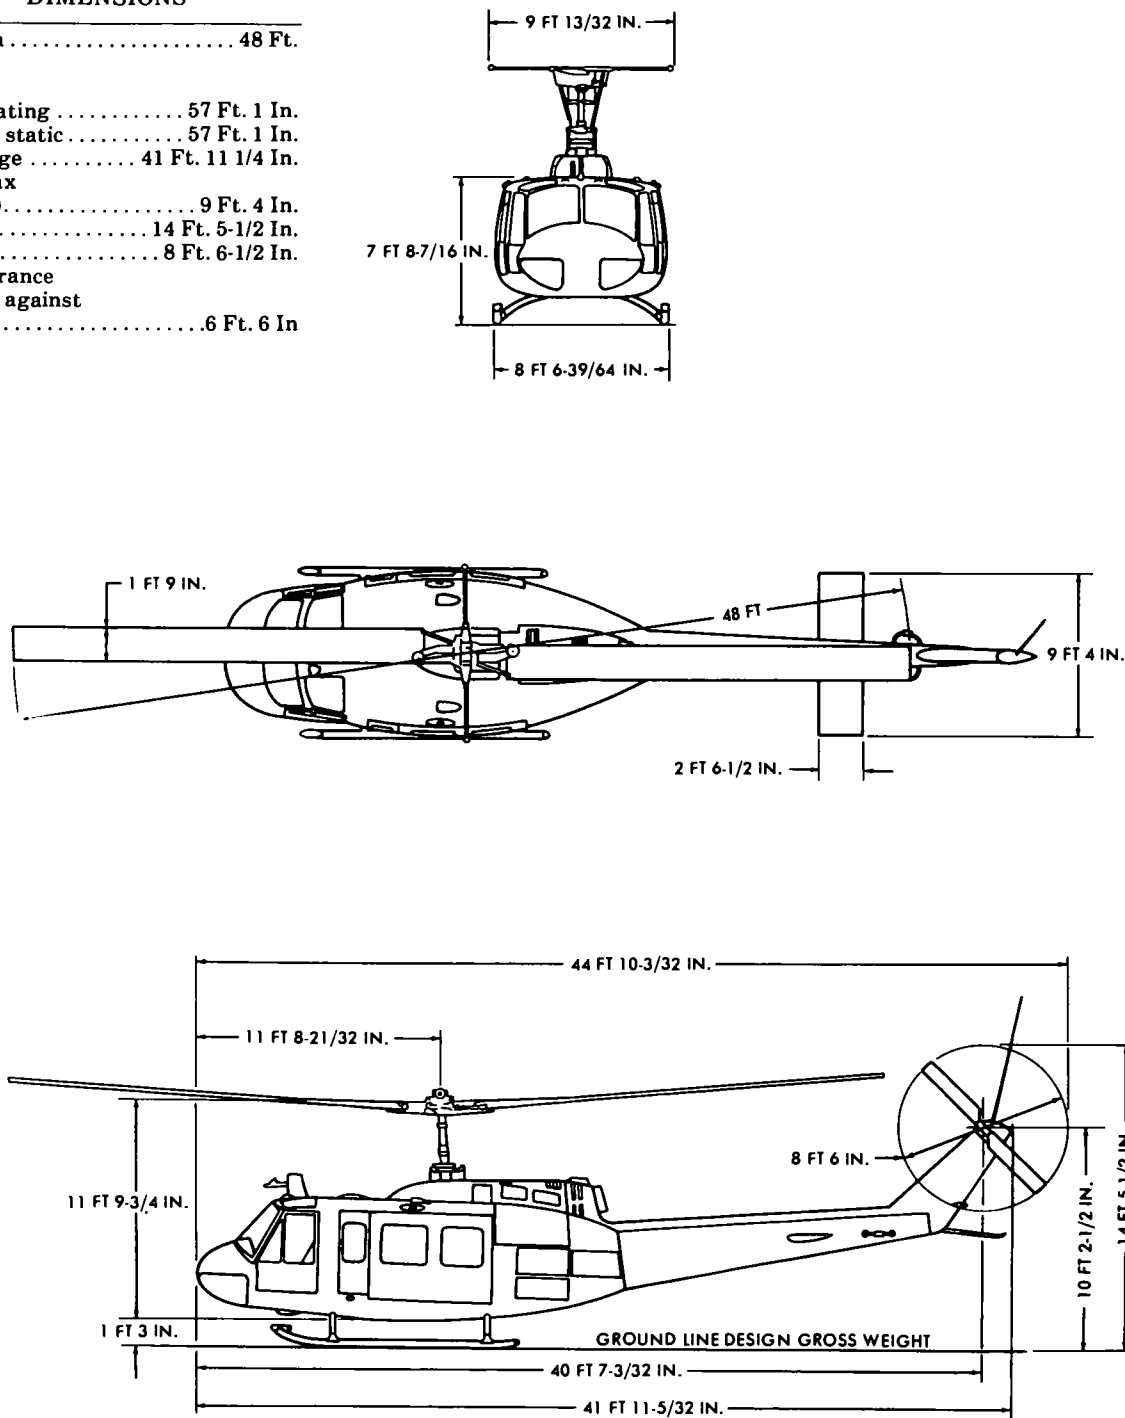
Principal Dimensions, UH-1V (Iroquois)
